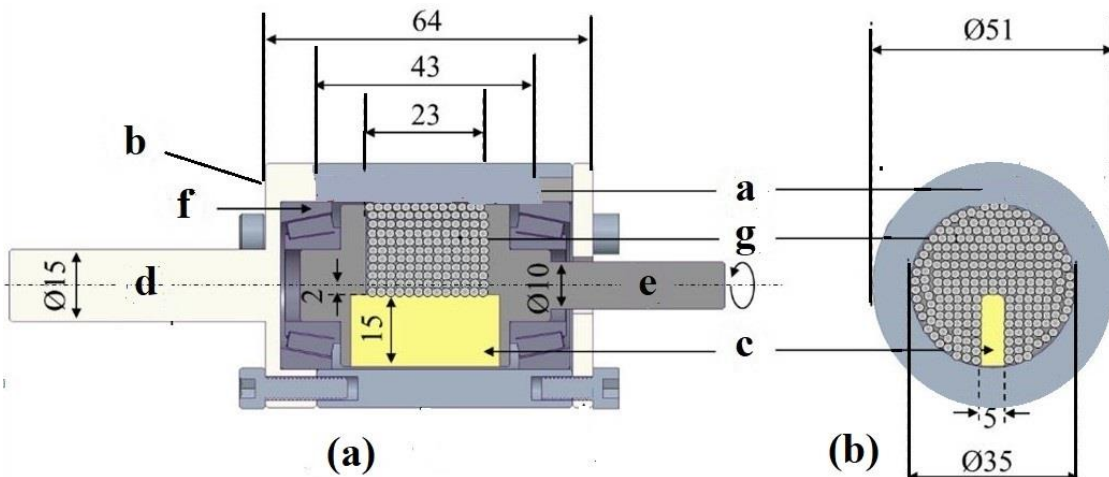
Schematic diagram of the single-chamber rotary particle damper: (a) cross-sectional side views of the damper. (b) cross-sectional top views of the damper. a. body, b. cover, c. rotor, d. holder, e. shaft, f. bearings, g. elastomer particles
